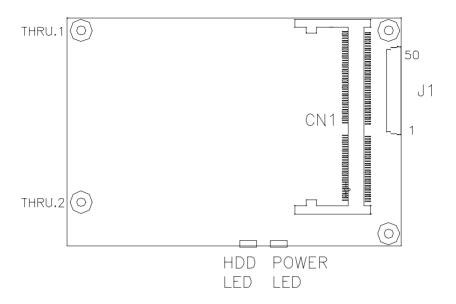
Board layout: location of Pin 1 of J1 (solder side)
